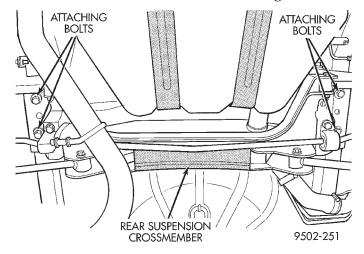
Suspension Crossmember Attachment To Frame Rails
